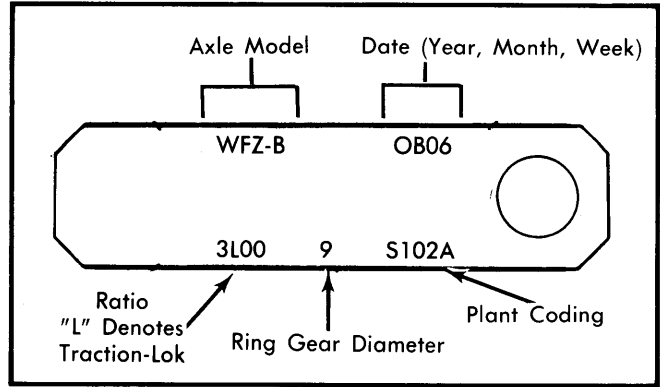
Ford Motor Co. Rear Axle Identification Tag
